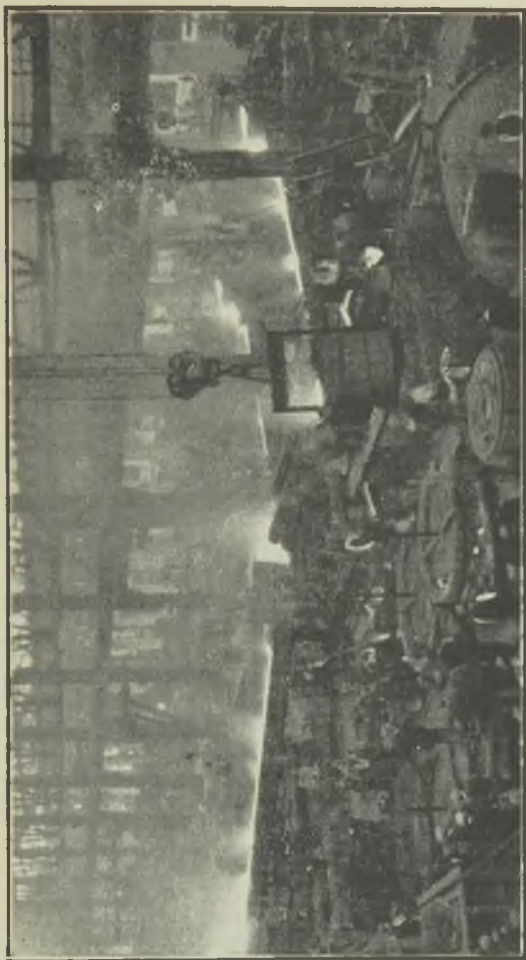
CASTING 70 TONS OF METAL FOR A TURBINE CASING.
